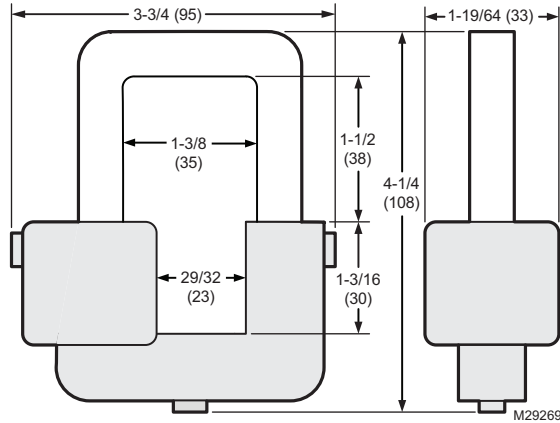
400 Amp current sensor dimensions in in. (mm).
